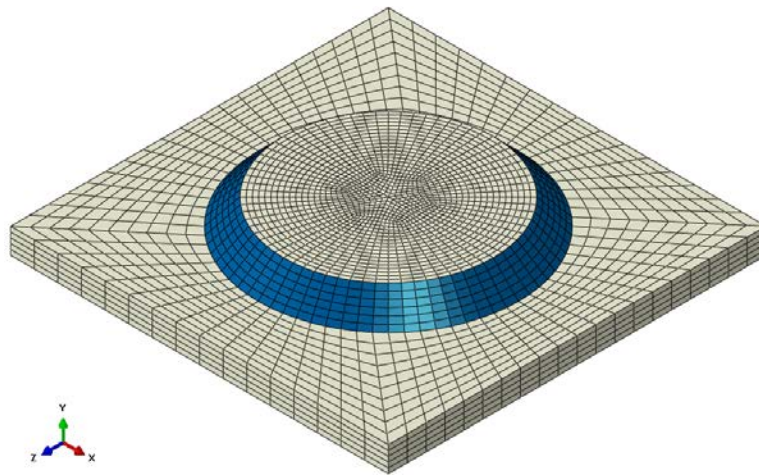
‘Boss’ reinforced plate weld model (lap weld)
